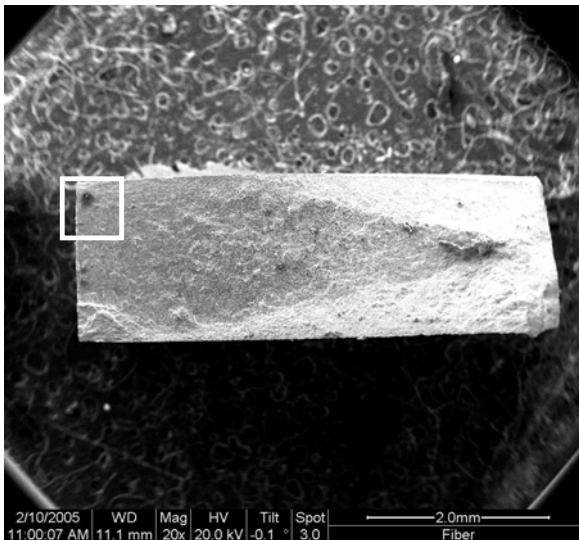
Specimen Ti-04, overall view of fracture surface
